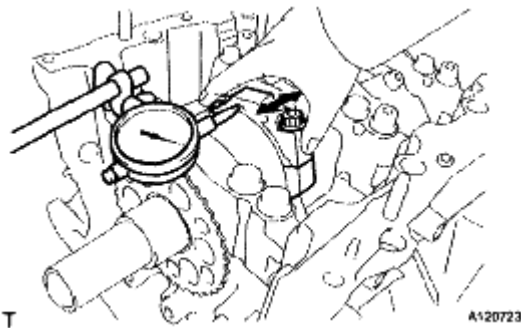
Measuring Connecting Rod Thrust Clearance Using Dial Indicator
